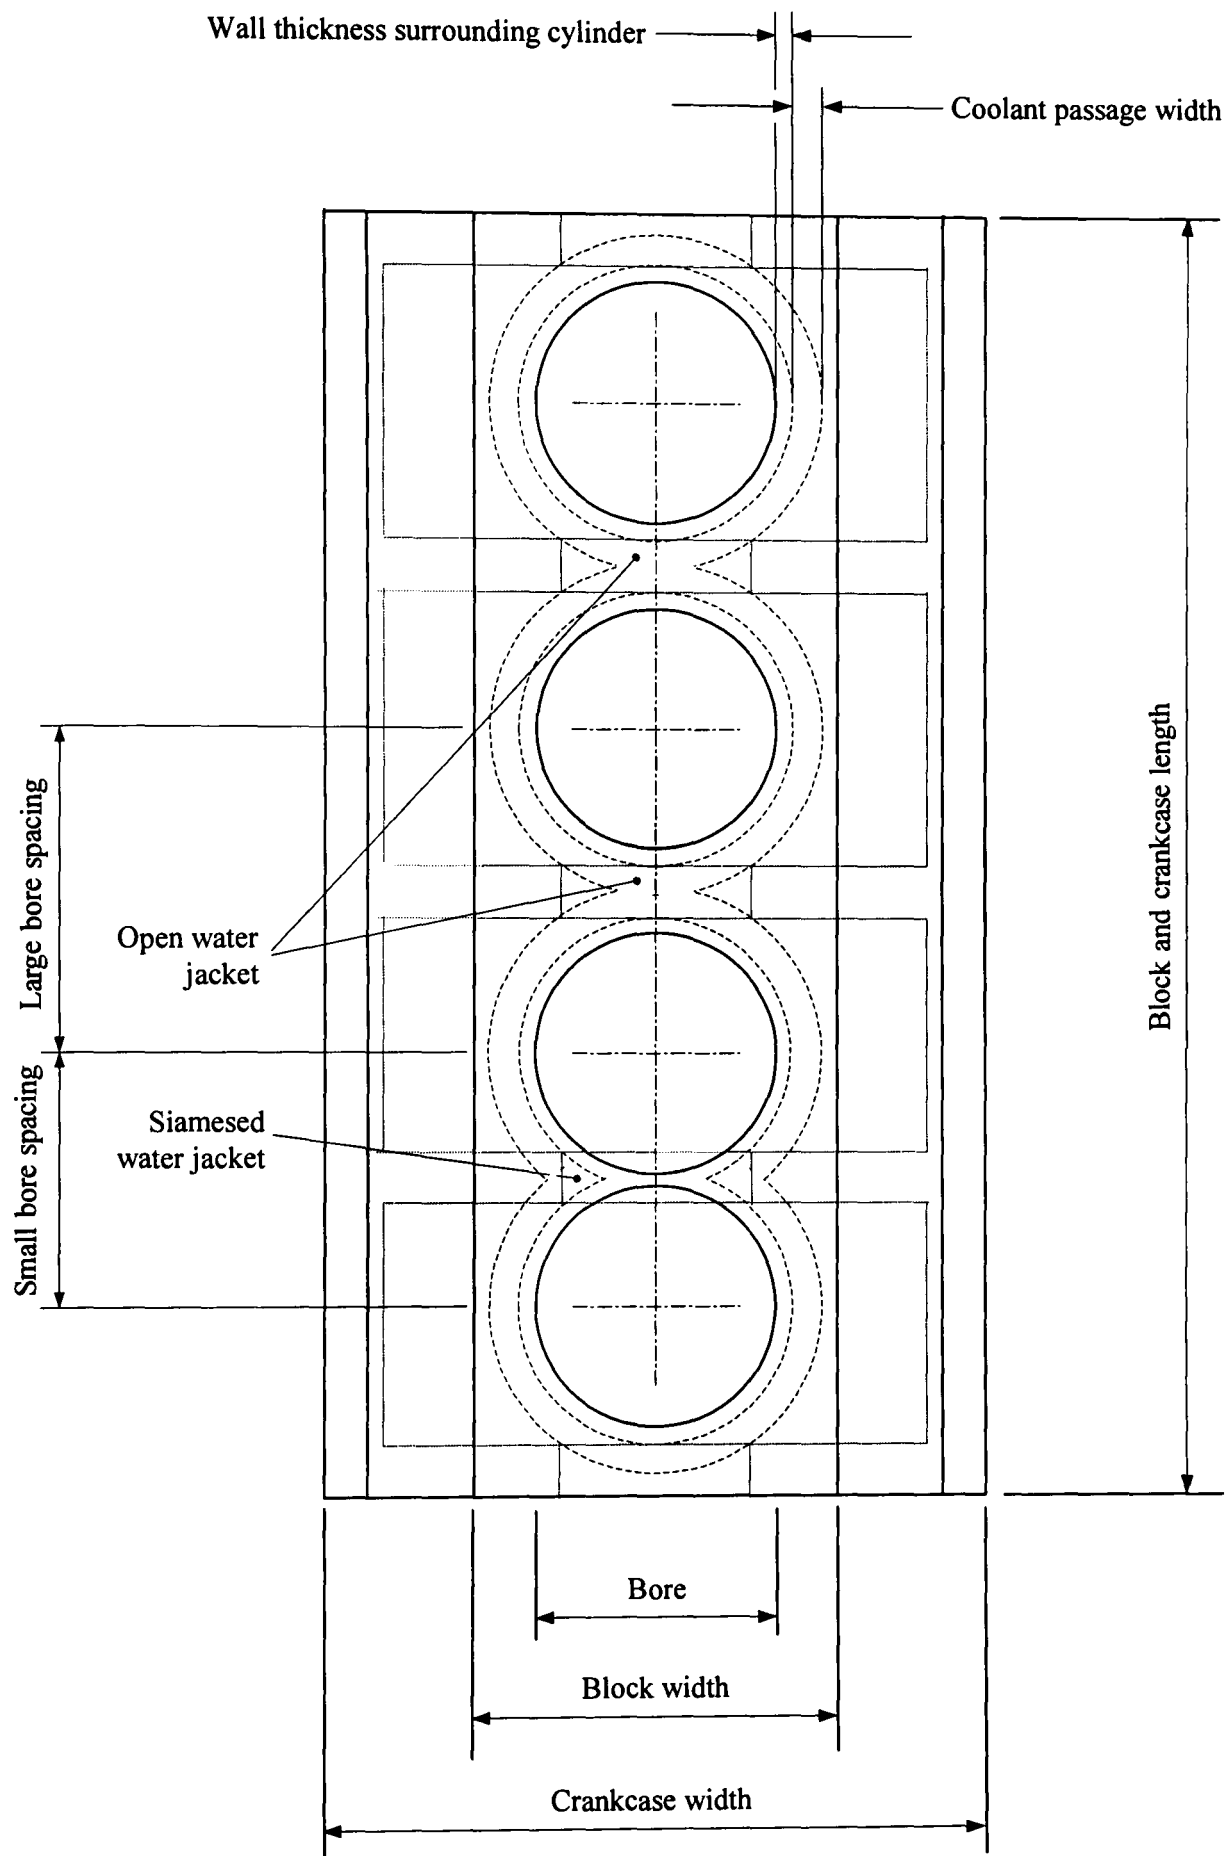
Plan view of the block, showing some of the key dimensions in determining the shape and size of the block. Both siamesed and open water jackets are shown, although only one configuration is used in any one engine.
